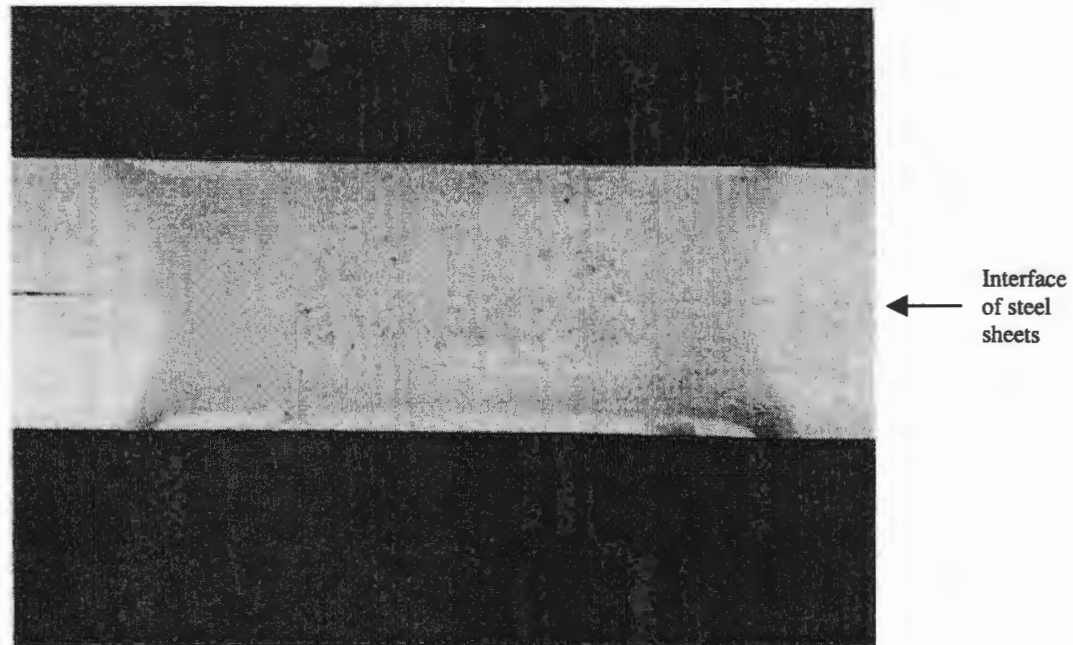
Cross section of a spot weld specimen etched with 1% nital etchant (note the interface of the two steel sheets present within the weld region); magnified 10 $\times$ .
